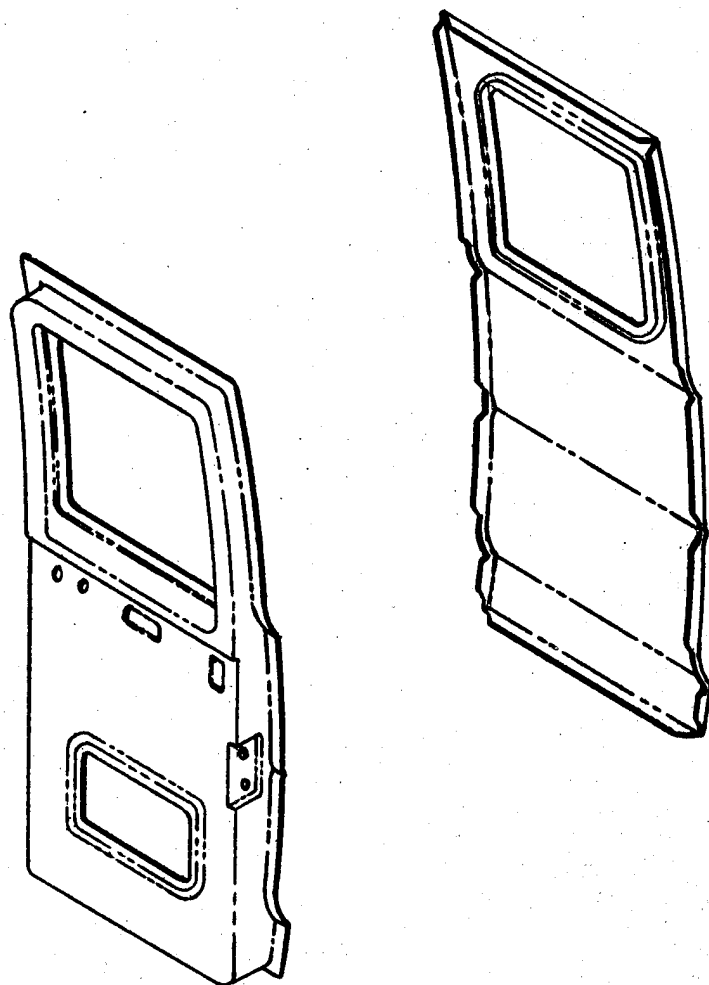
VAN - FRONT DOOR ASSEMBLY
